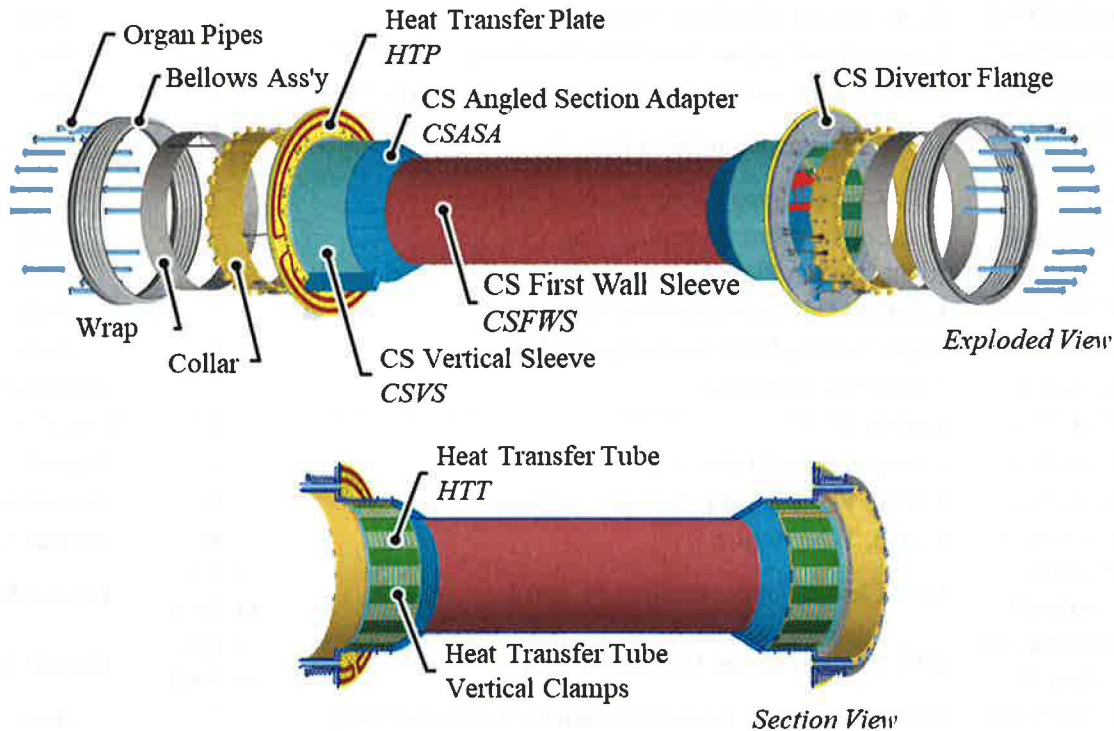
Exploded (top) and Section (bottom) views of the components of the CSC fabrication
